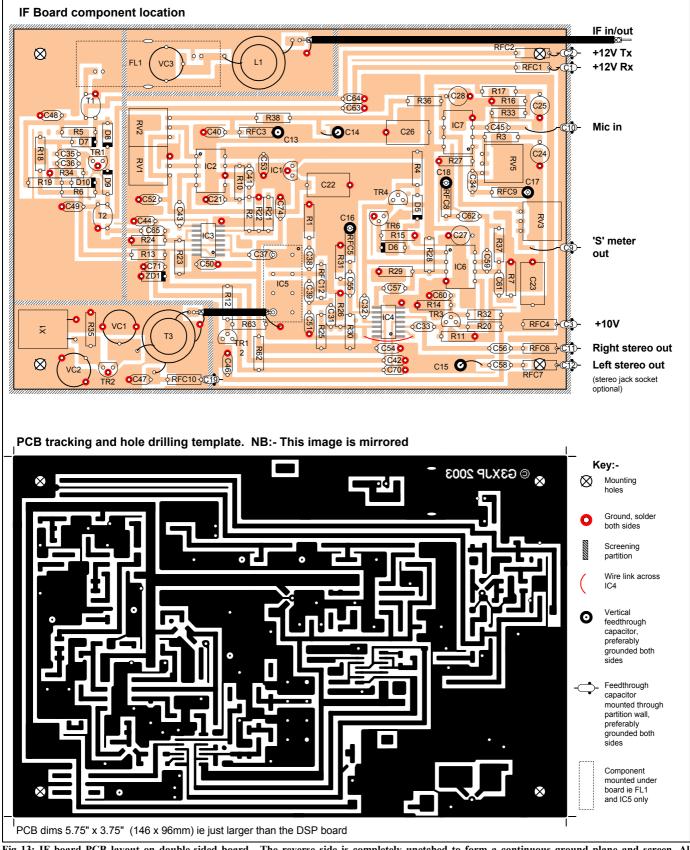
IF board PCB layout on double-sided board. The reverse side is completely unetched to form a continuous ground plane and screen. All components with the exception of the crystal filter FL1 and the SBL-1 mixer, IC5 are mounted on the track side. You may need to customise the tracking to suit your crystal filter. The 'holes' are shown on the component layout only to define the tracks should you be producing the PCB by some manual method. Only components which feed through to the back of the board require actual drilled holes and these are as defined on the tracking template. The tracking template image is mirrored (ie flipped left-to-right) for direct copying to iron-on laser film. The basic drilling size is 0.7mm with holes for mounting, feedthroughs etc drilled larger to suit. Some internal screening partitions are made from PCB material or brass shim stock. Those around the X1 crystal oscillator need to be particularly RF-tight to prevent oscillator leakage into the IF strip.
